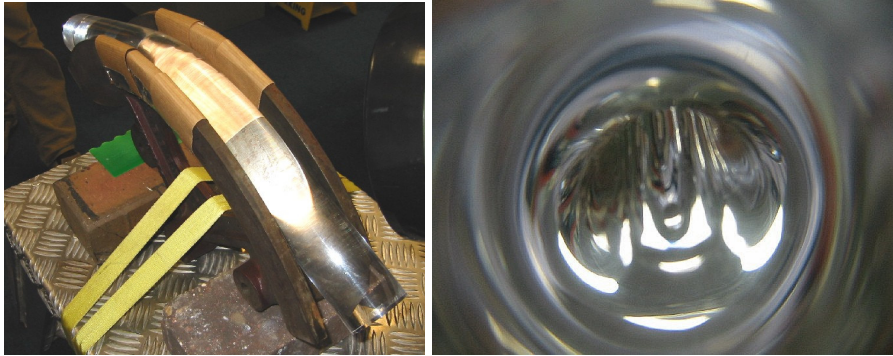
19: Pipe former with rod and inner surface of bent rod
